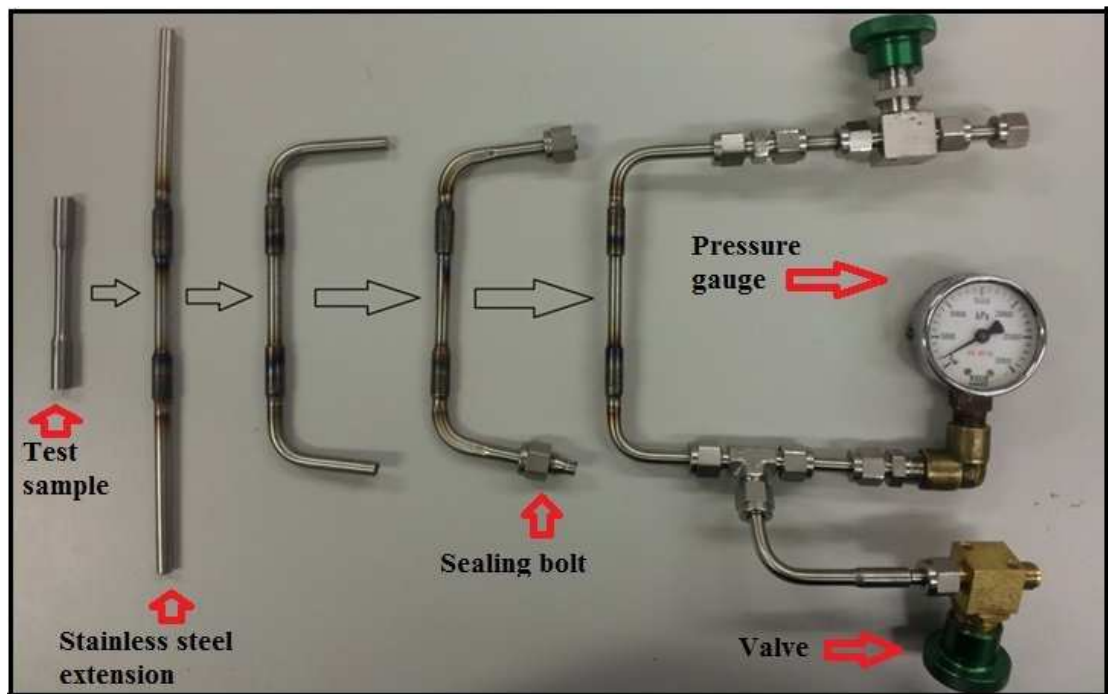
Stages in manufacturing of tensile samples and set-up for tensile testing with gas under pressure inside the sample.
